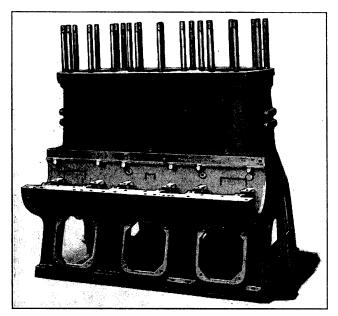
Chicago Pneumatic Cylinder Block and Crankcase.
